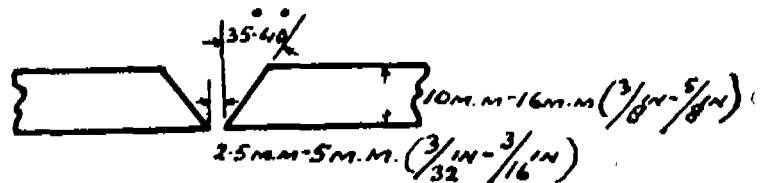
(ix) (b) FOR USE WITH SPECIAL WELDING TECHNIQUE
